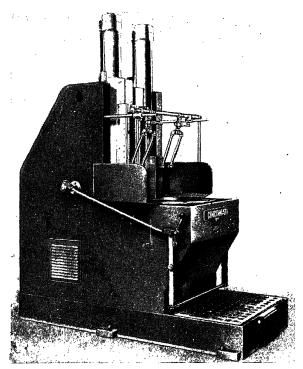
Broaching machine. A broaching machine guides the broaches by the work (see Fig. 96). The power to drive the two vertical rams is usually transmitted by hydraulic means. A broach is a quick way to machine a surface if a large number of like pieces are to be made. Since a broach must be completely rebuilt for any other operation, practically the entire cost of the broaches must be charged to that operation. (Cincinnati.)
